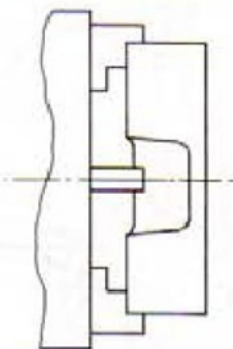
Mount the castings in a 4-jaw chuck and machine the back face to clean up.
